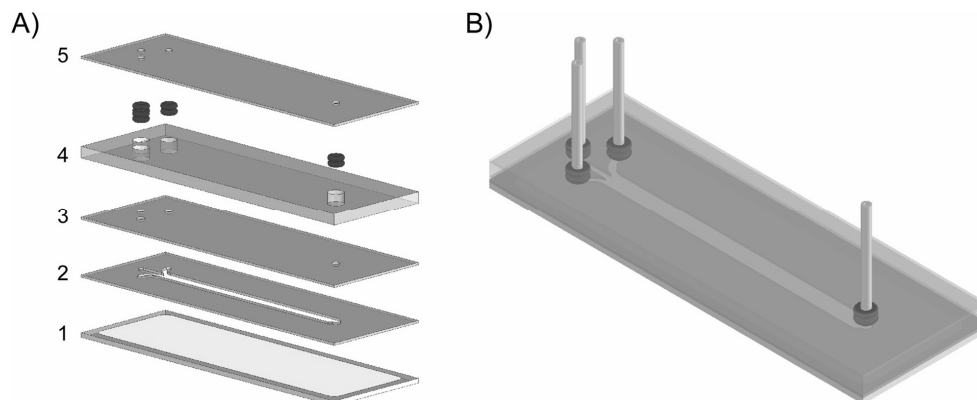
Microfluidic assay device and assembly. Exploded view (A) shows layers used (from bottom to top): (1) substrate, a soda lime glass 75 mm \times 25 mm microscope slide coated with 4.5-nm gold on its upper surface; this gold surface is functionalized prior to device assembly (see text); (2) channel, a 12- μ m Mylar sheet coated on both sides with 25- μ m pressure-sensitive adhesive to produce a channel 62 μ m in depth; it features a 3.6-mm channel laser-cut from center with three inlets and a single outlet; (3) device cap, a 25- μ m Mylar layer (with adhesive on top only) with vias to permit fluid flow; (4) O-ring seat, a 2.5-mm PMMA layer with laser-cut holes for EPDM O-rings; (5) O-ring retainer, a 25- μ m Mylar layer (adhesive on bottom) with laser-cut holes to pass tubing. (B) Rendering of assembled device and tubing (pumps, valves, and waste reservoir not shown). (Reproduced from *Anal. Chem.* 79 (2007) 3542-3548)¹⁵⁷
